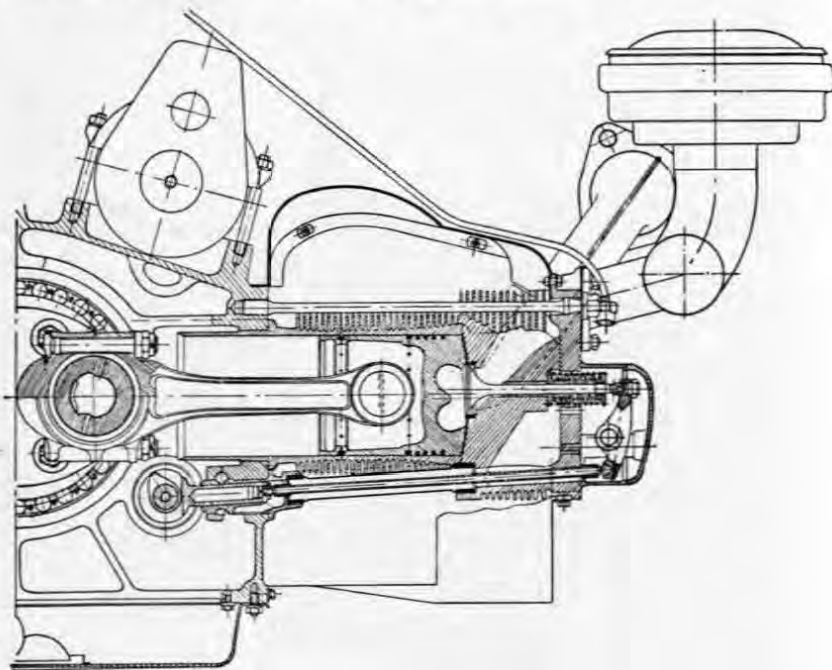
Transverse section of the flat six-cylinder Tatra 116 engine.
